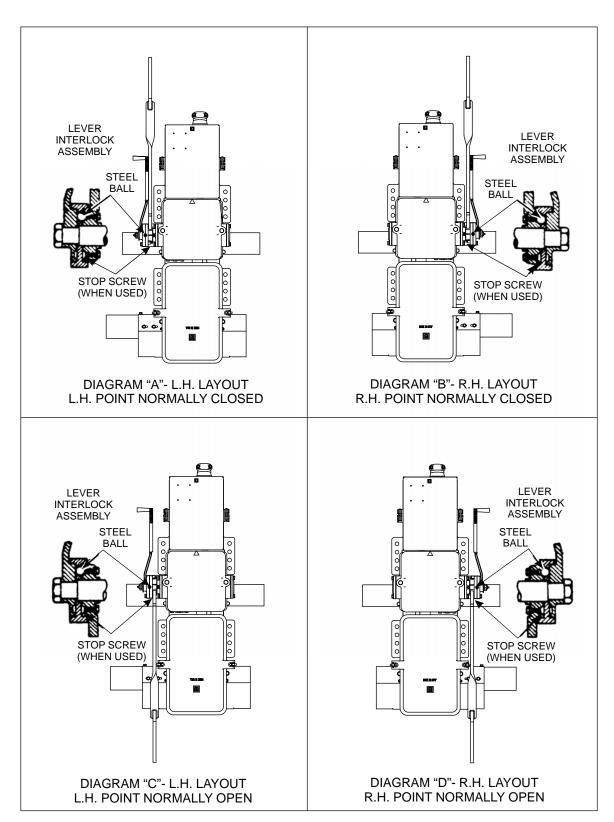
Standard Lever Interlock Assemblies for Style M-23A or M-23B Switch Machines
